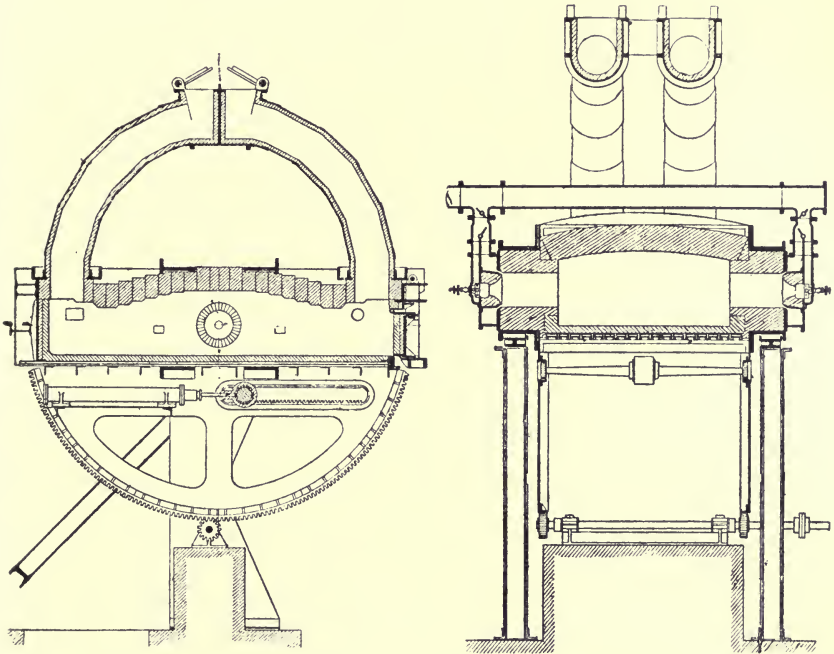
The Roe Puddling Machine : Longitudinal and Cross Sections.
